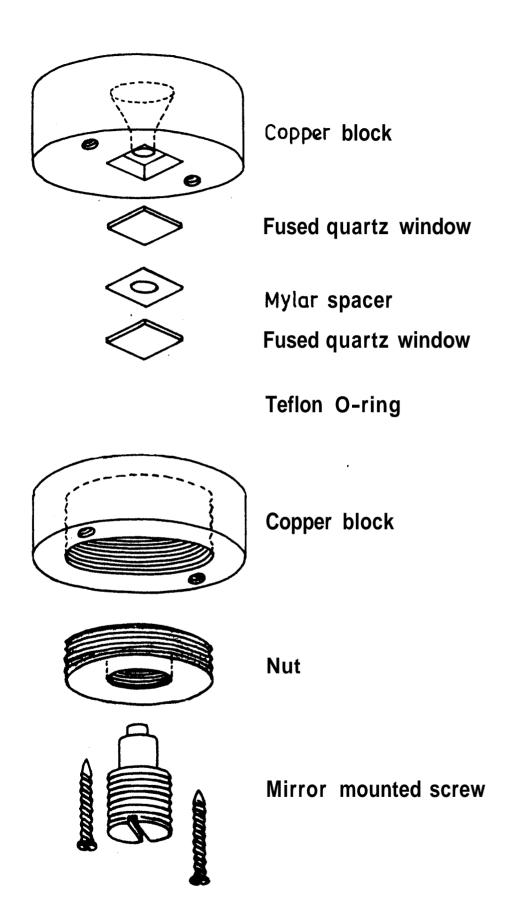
Exploded view of sample cell and mounting assembly used in Raman measurements.
